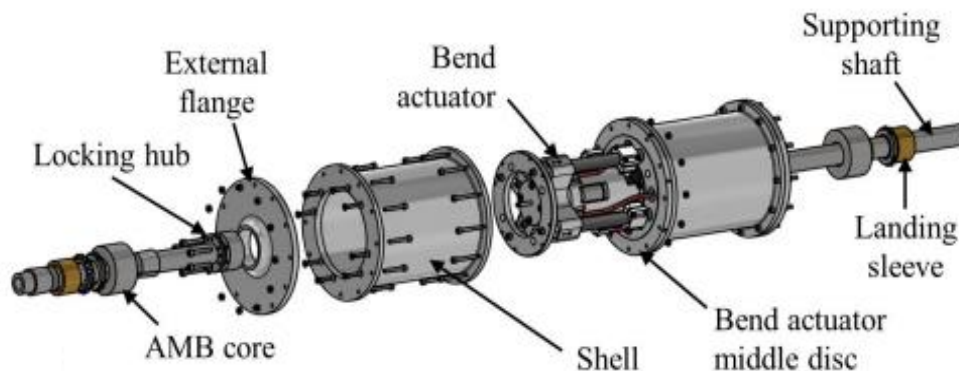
Exploded view of the rotor and its internal bend actuator system.
